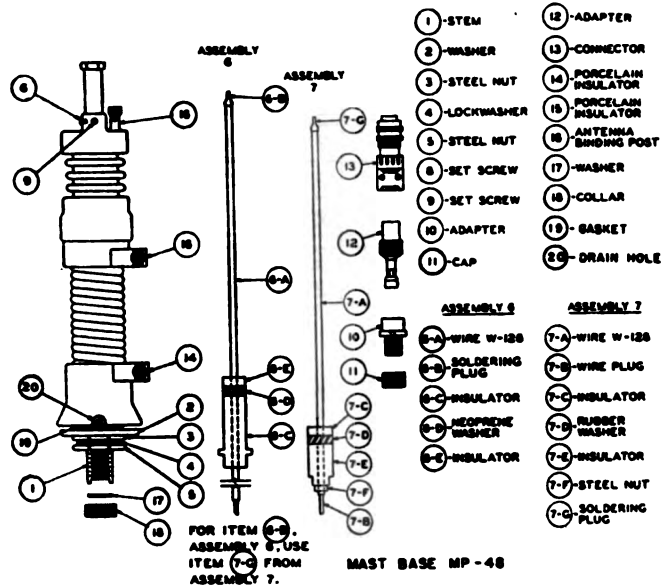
Mast Base MP-48 and MP-48-A, assembly.
